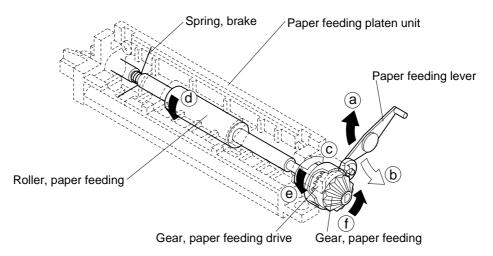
Operation of Gear, paper feeding drive and Gear, paper feeding
